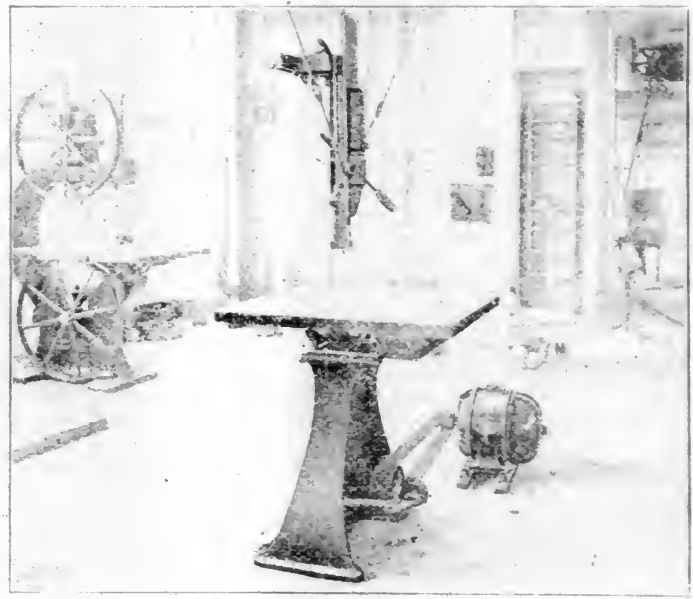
BELTED DRIVE FOR A JOB SAW FROM A 1-H. P. SLOW-SPEED MOTOR.
